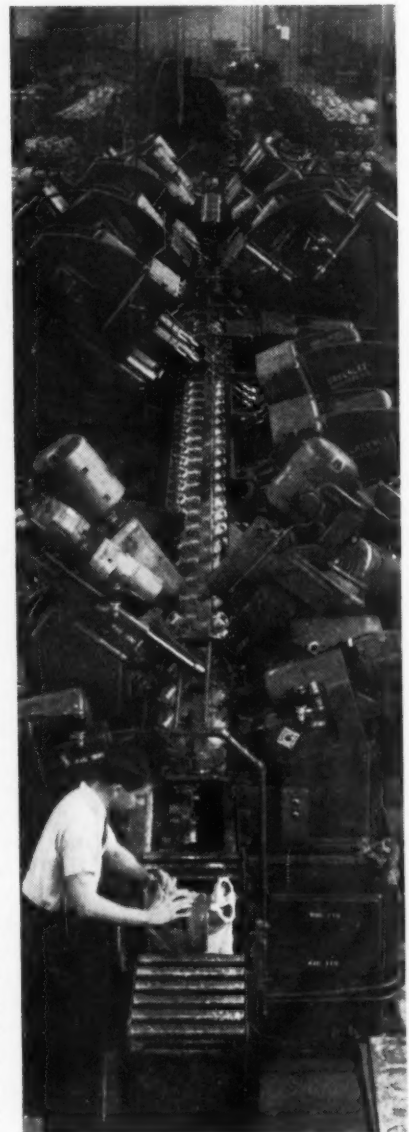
END VIEW OF COMPLETE GREENLEE TRANSFER MACHINE SHOWING OPERATOR REMOVING A COMPLETED CYLINDER HEAD
